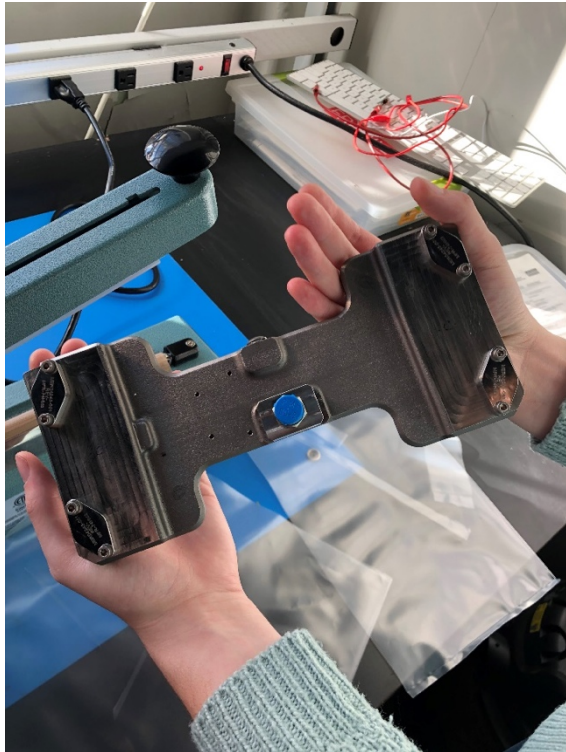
Burst Unit Manifold with Blanking Plates Attached
